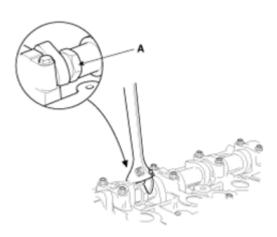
Removing Sprocket Bolt Courtesy of KIA MOTORS AMERICA, INC.
